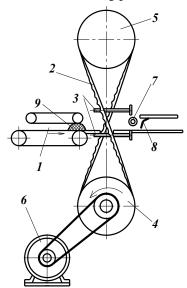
Bread-cutting machine: 1 - feeding mechanism; 2 - belt knives; 3 - guide
